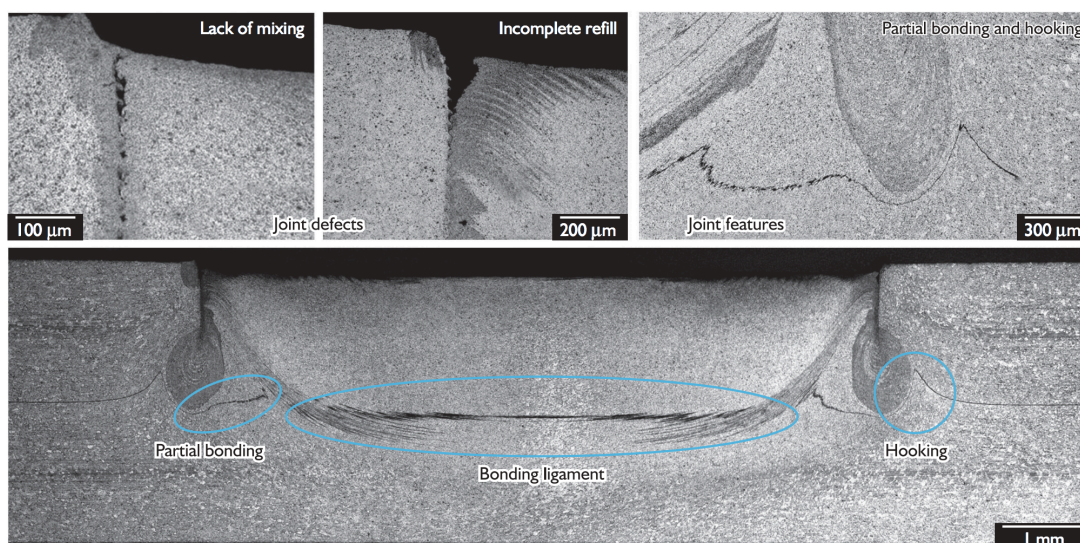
Macrographs of a typical RFSSW joint cross section showing weld defects [45].
